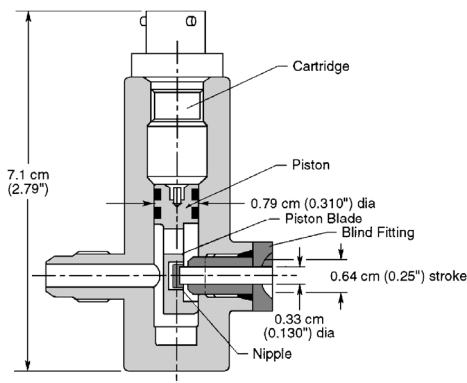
Cross-sectional view of Scot pyrovalve; body and blind fittings are aluminum.
